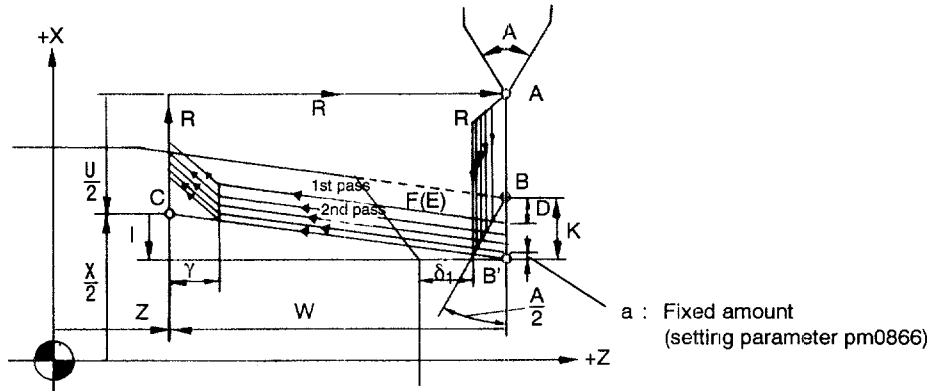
Execution of Automatic Thread Cutting Cycle
